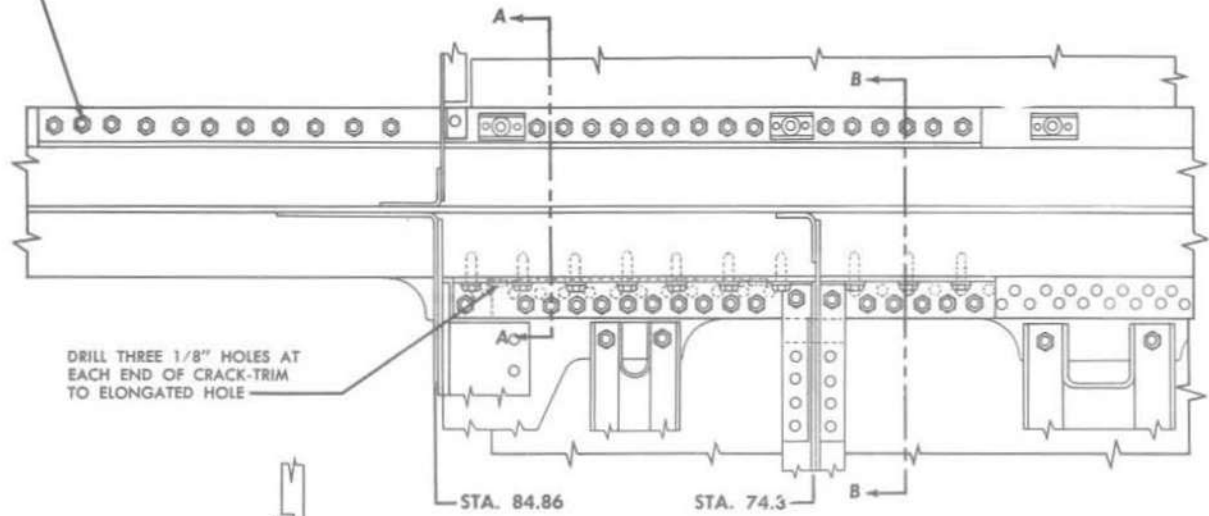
Special Repair of Lower Front Spar Cap (Sheet 1 of 4)
